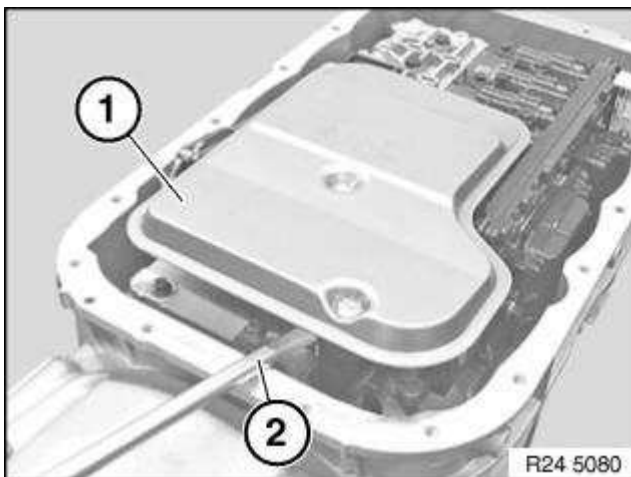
Remove Transmission Oil Filter (1) With A Suitable Tool (2)
